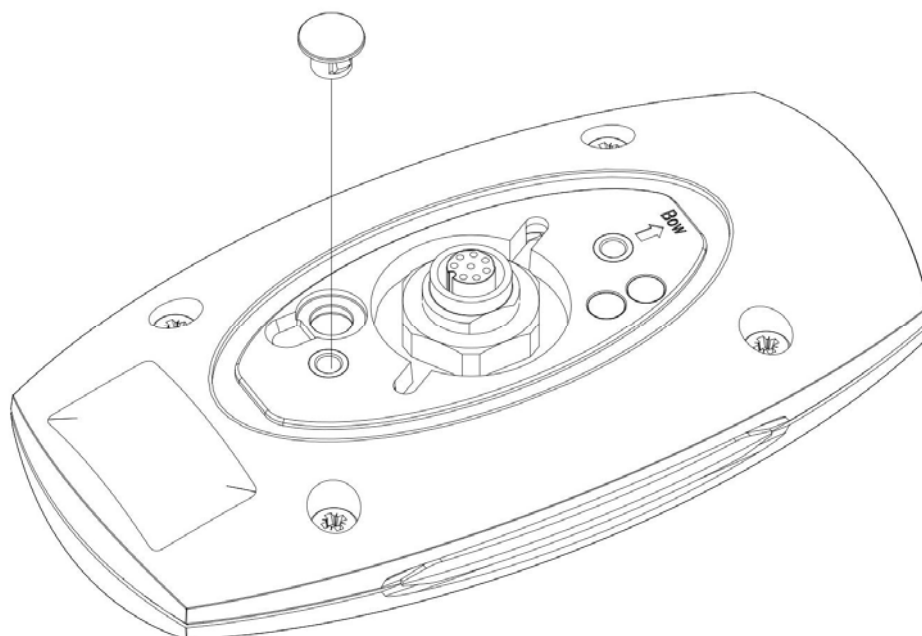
ROOF MOUNT INSTALLATION STEP 4 (REMOVE CAP FOR DIP-SWITCH SETTING)
